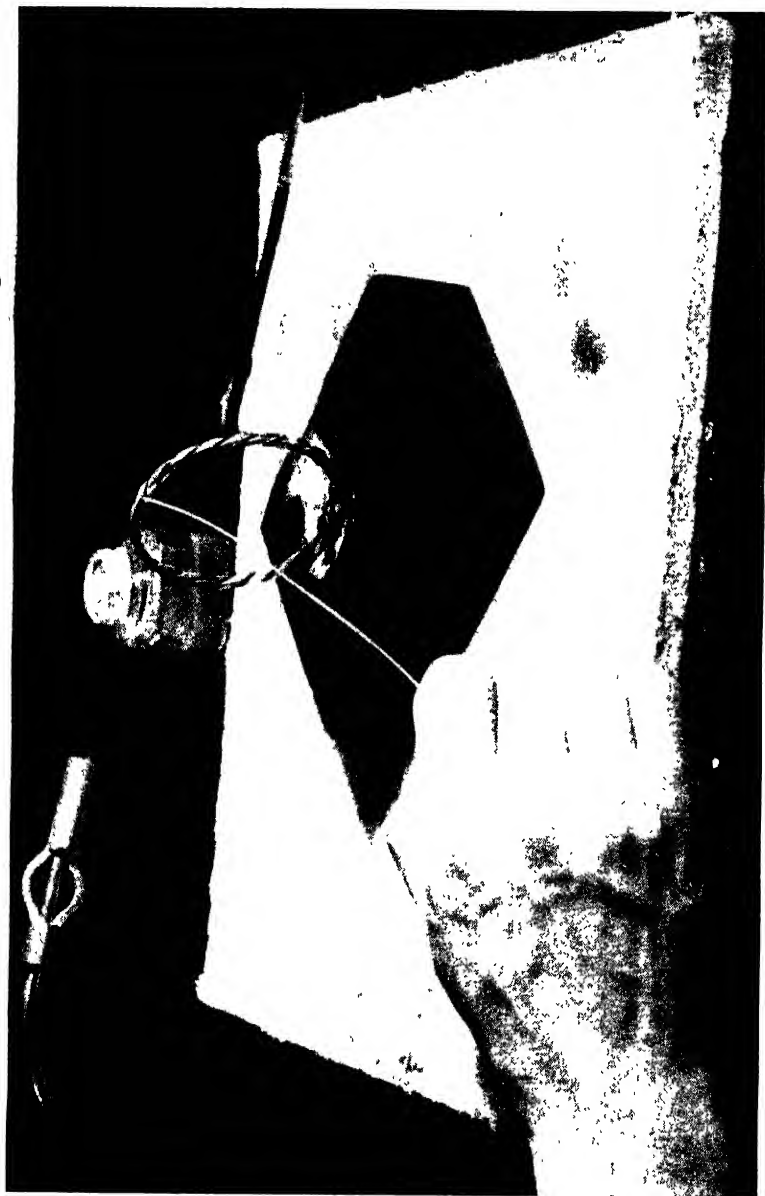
Joining the ends of a bangle using wire solder (hard). (*Torch, Courtesy of Dresco Dental Supply Co., Brooklyn, N. Y.*)
